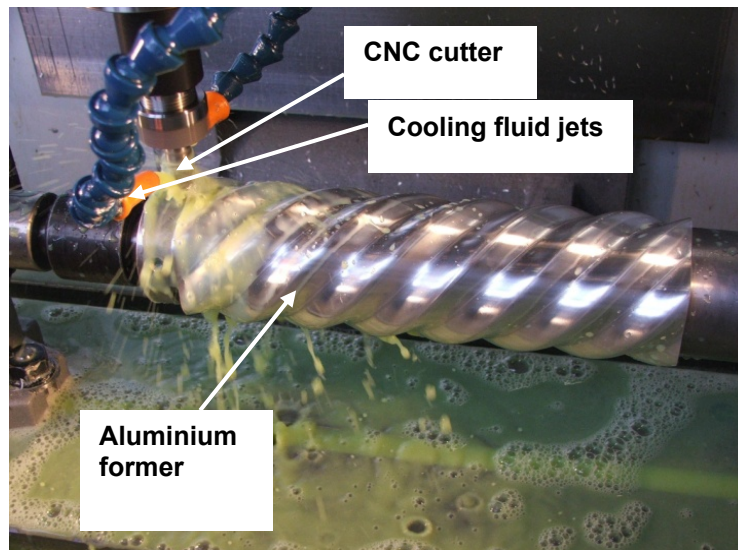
Digital photograph of CNC machine cutting 5-fold helical shape on aluminium former.
